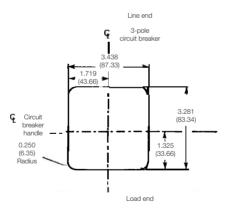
circuit breaker escutcheon cutout dimensions for 3-pole circuit breakers
